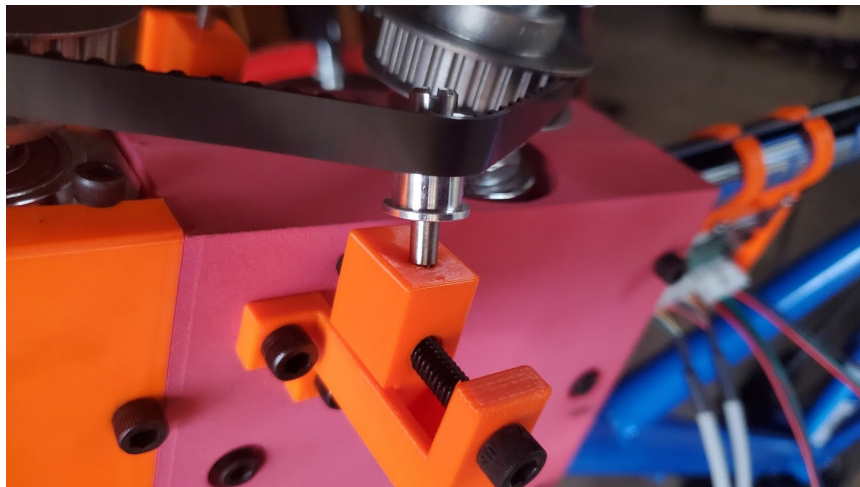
The initial design of the torque motor belt tensioner failed due to excessive cantilevered stress on the shoulder bolt supporting the idler pulleys.
